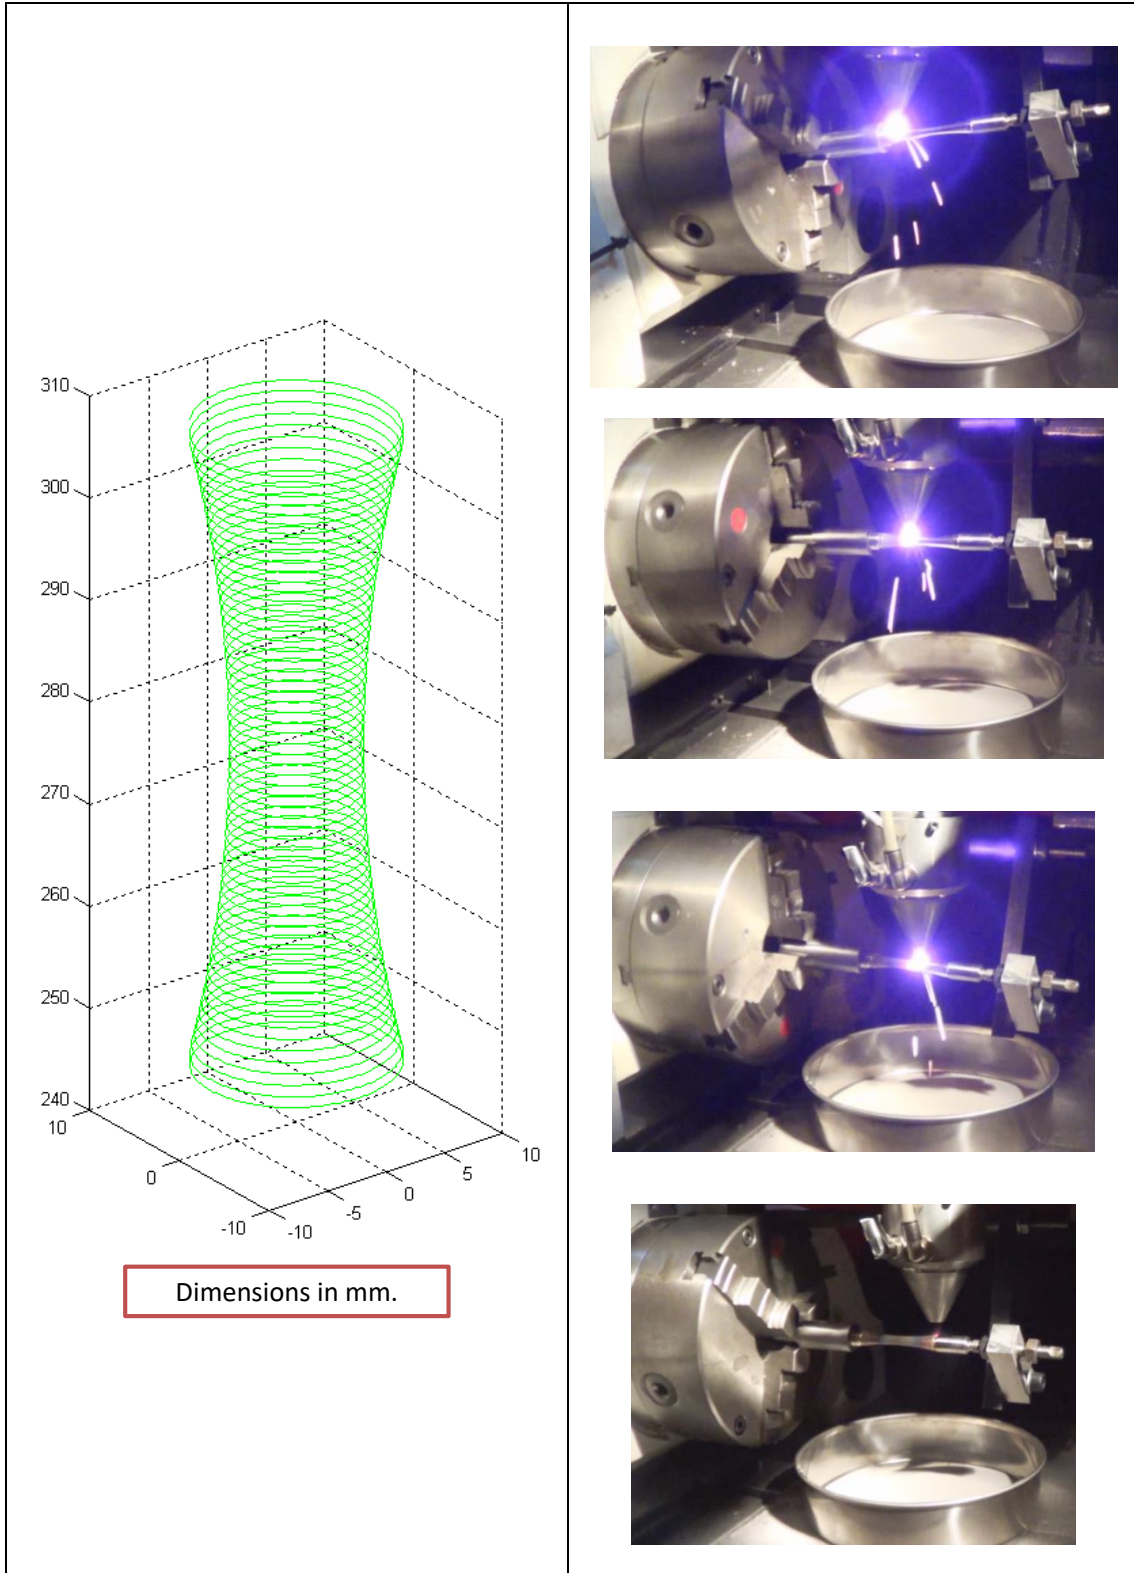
Left, drawing of Helix path on CAM code coordinates for a coated hourglass-type specimen. Right, photographs of the sequence (from top to bottom), of the implementation of the code on a CNC machine equipped with Laser Cladding AM process. It should be taken into account that the kinematic elements of the CNC machine allow the nozzle to be perpendicular as possible to the substrate surface as far as possible during material deposition (as shown in the photographic sequence).
